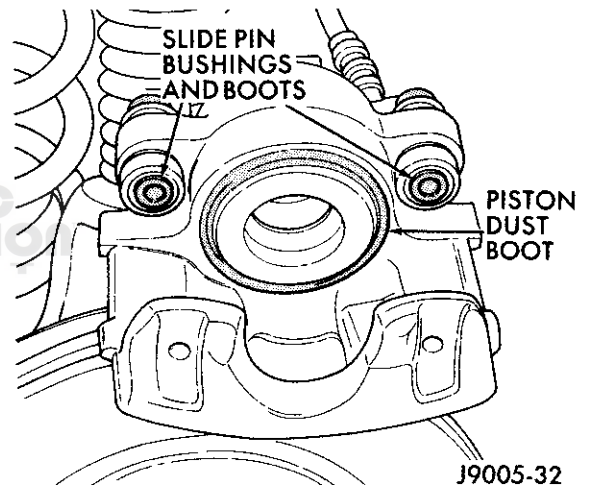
Inspect Caliper Dust Boots And Slide Bushings
